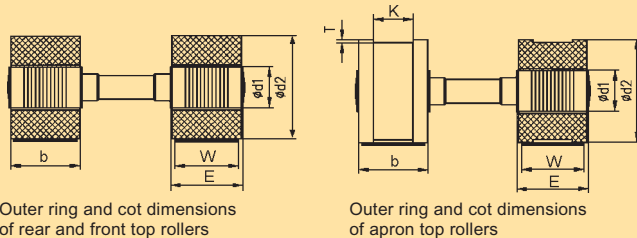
Fig. J: Top rollers with cot and outer ring dimensions for PK 1601
